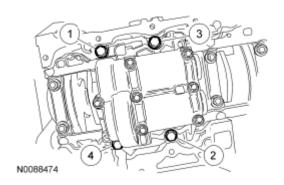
Identifying Balancer Unit Bolts Tightening Sequence
